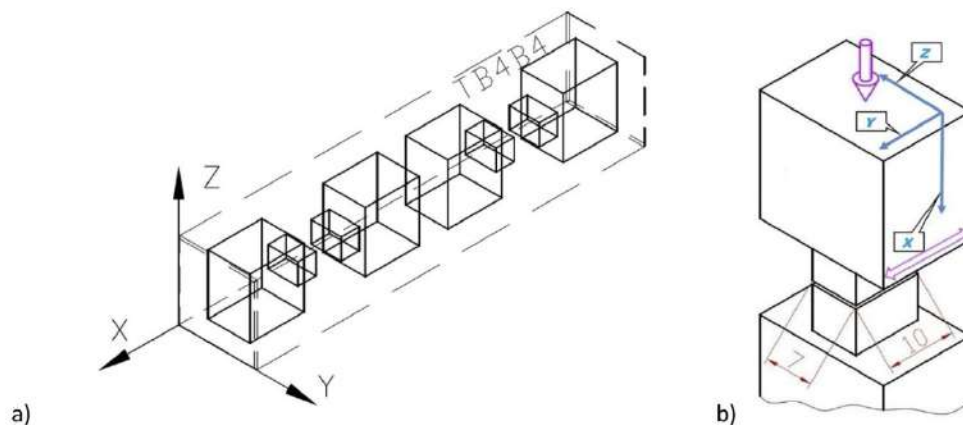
The scheme of a) samples cut from the billet and b) weld dimensions.
